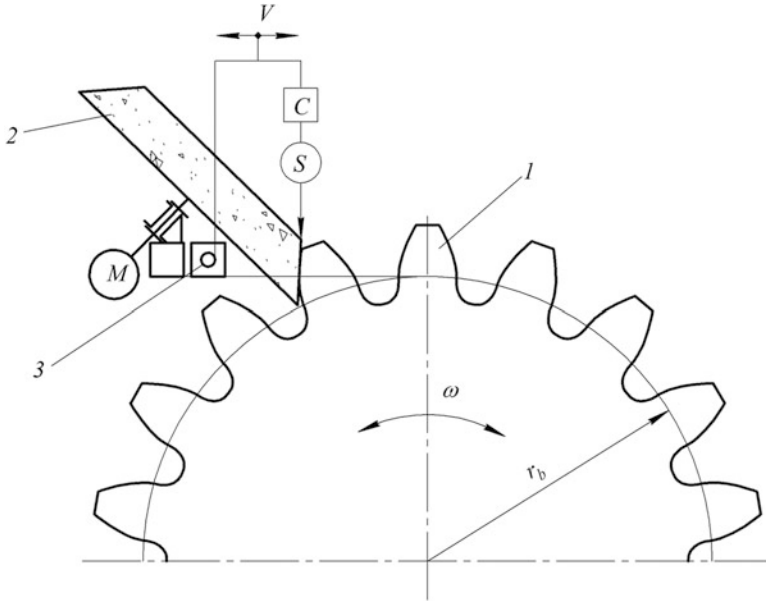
Error control scheme for grinding gears with longitudinal crowning
